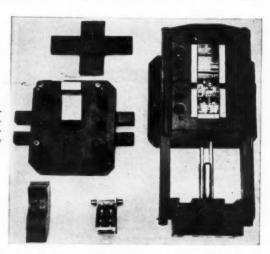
A finished distributor block, and the interesting mold set-up required for its production are here shown.
